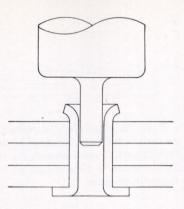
Sleeve type tubular rivet purchased with one head formed is set by simple tooling shown here.
